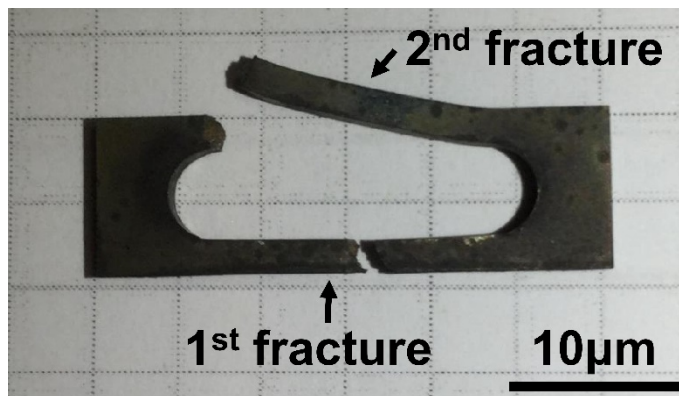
An example of a tested two bar specimen showing the asymmetric failure mechanism during the 2nd fracture
